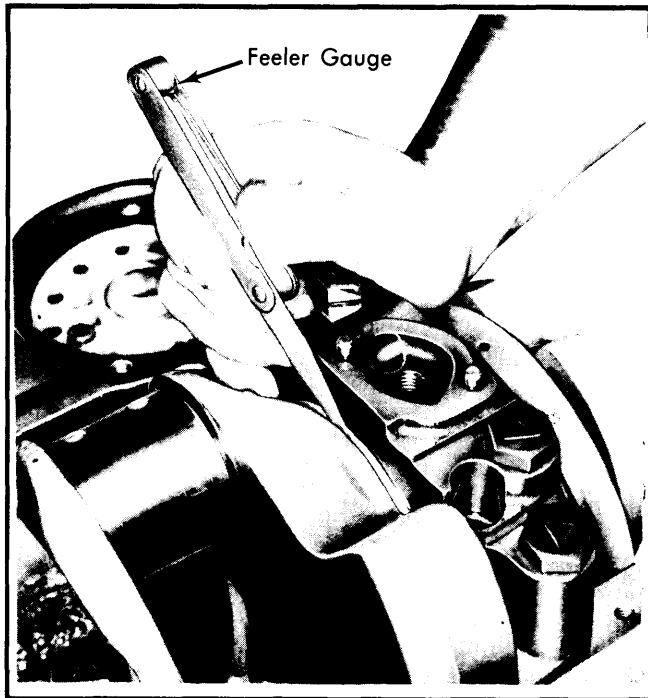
Using Feeler Gauge to Check Crankshaft End Play
